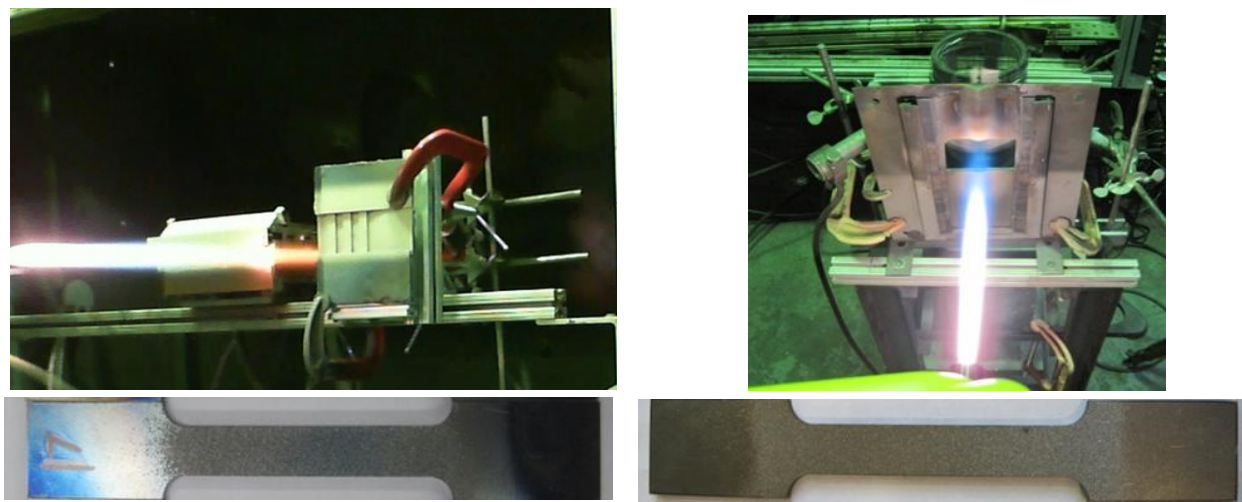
(a) Ni coatings deposited on the steady fixture using liquid fuel HVOF torch. (b) Ni coatings deposited on the rotating fixture. (c) Dogbone after a heat test on the steady fixture, the light blue color indicated the high temperature the substrate was subjected into. (d) Dogbone after a heat test on the rotating fixture
